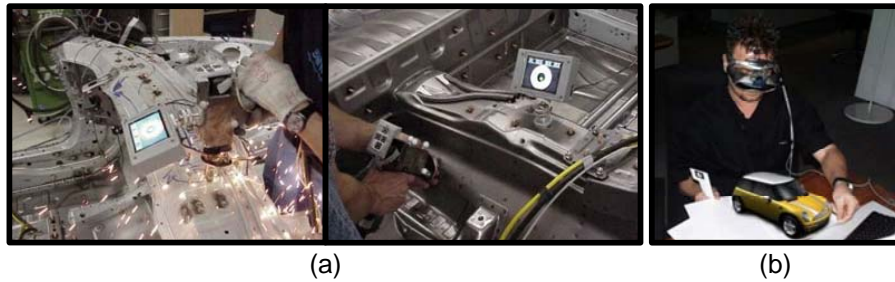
Industrial AR Applications. (a) The intelligent welding gun [34]. (b) Augmented desktop of a car modeler [62].
